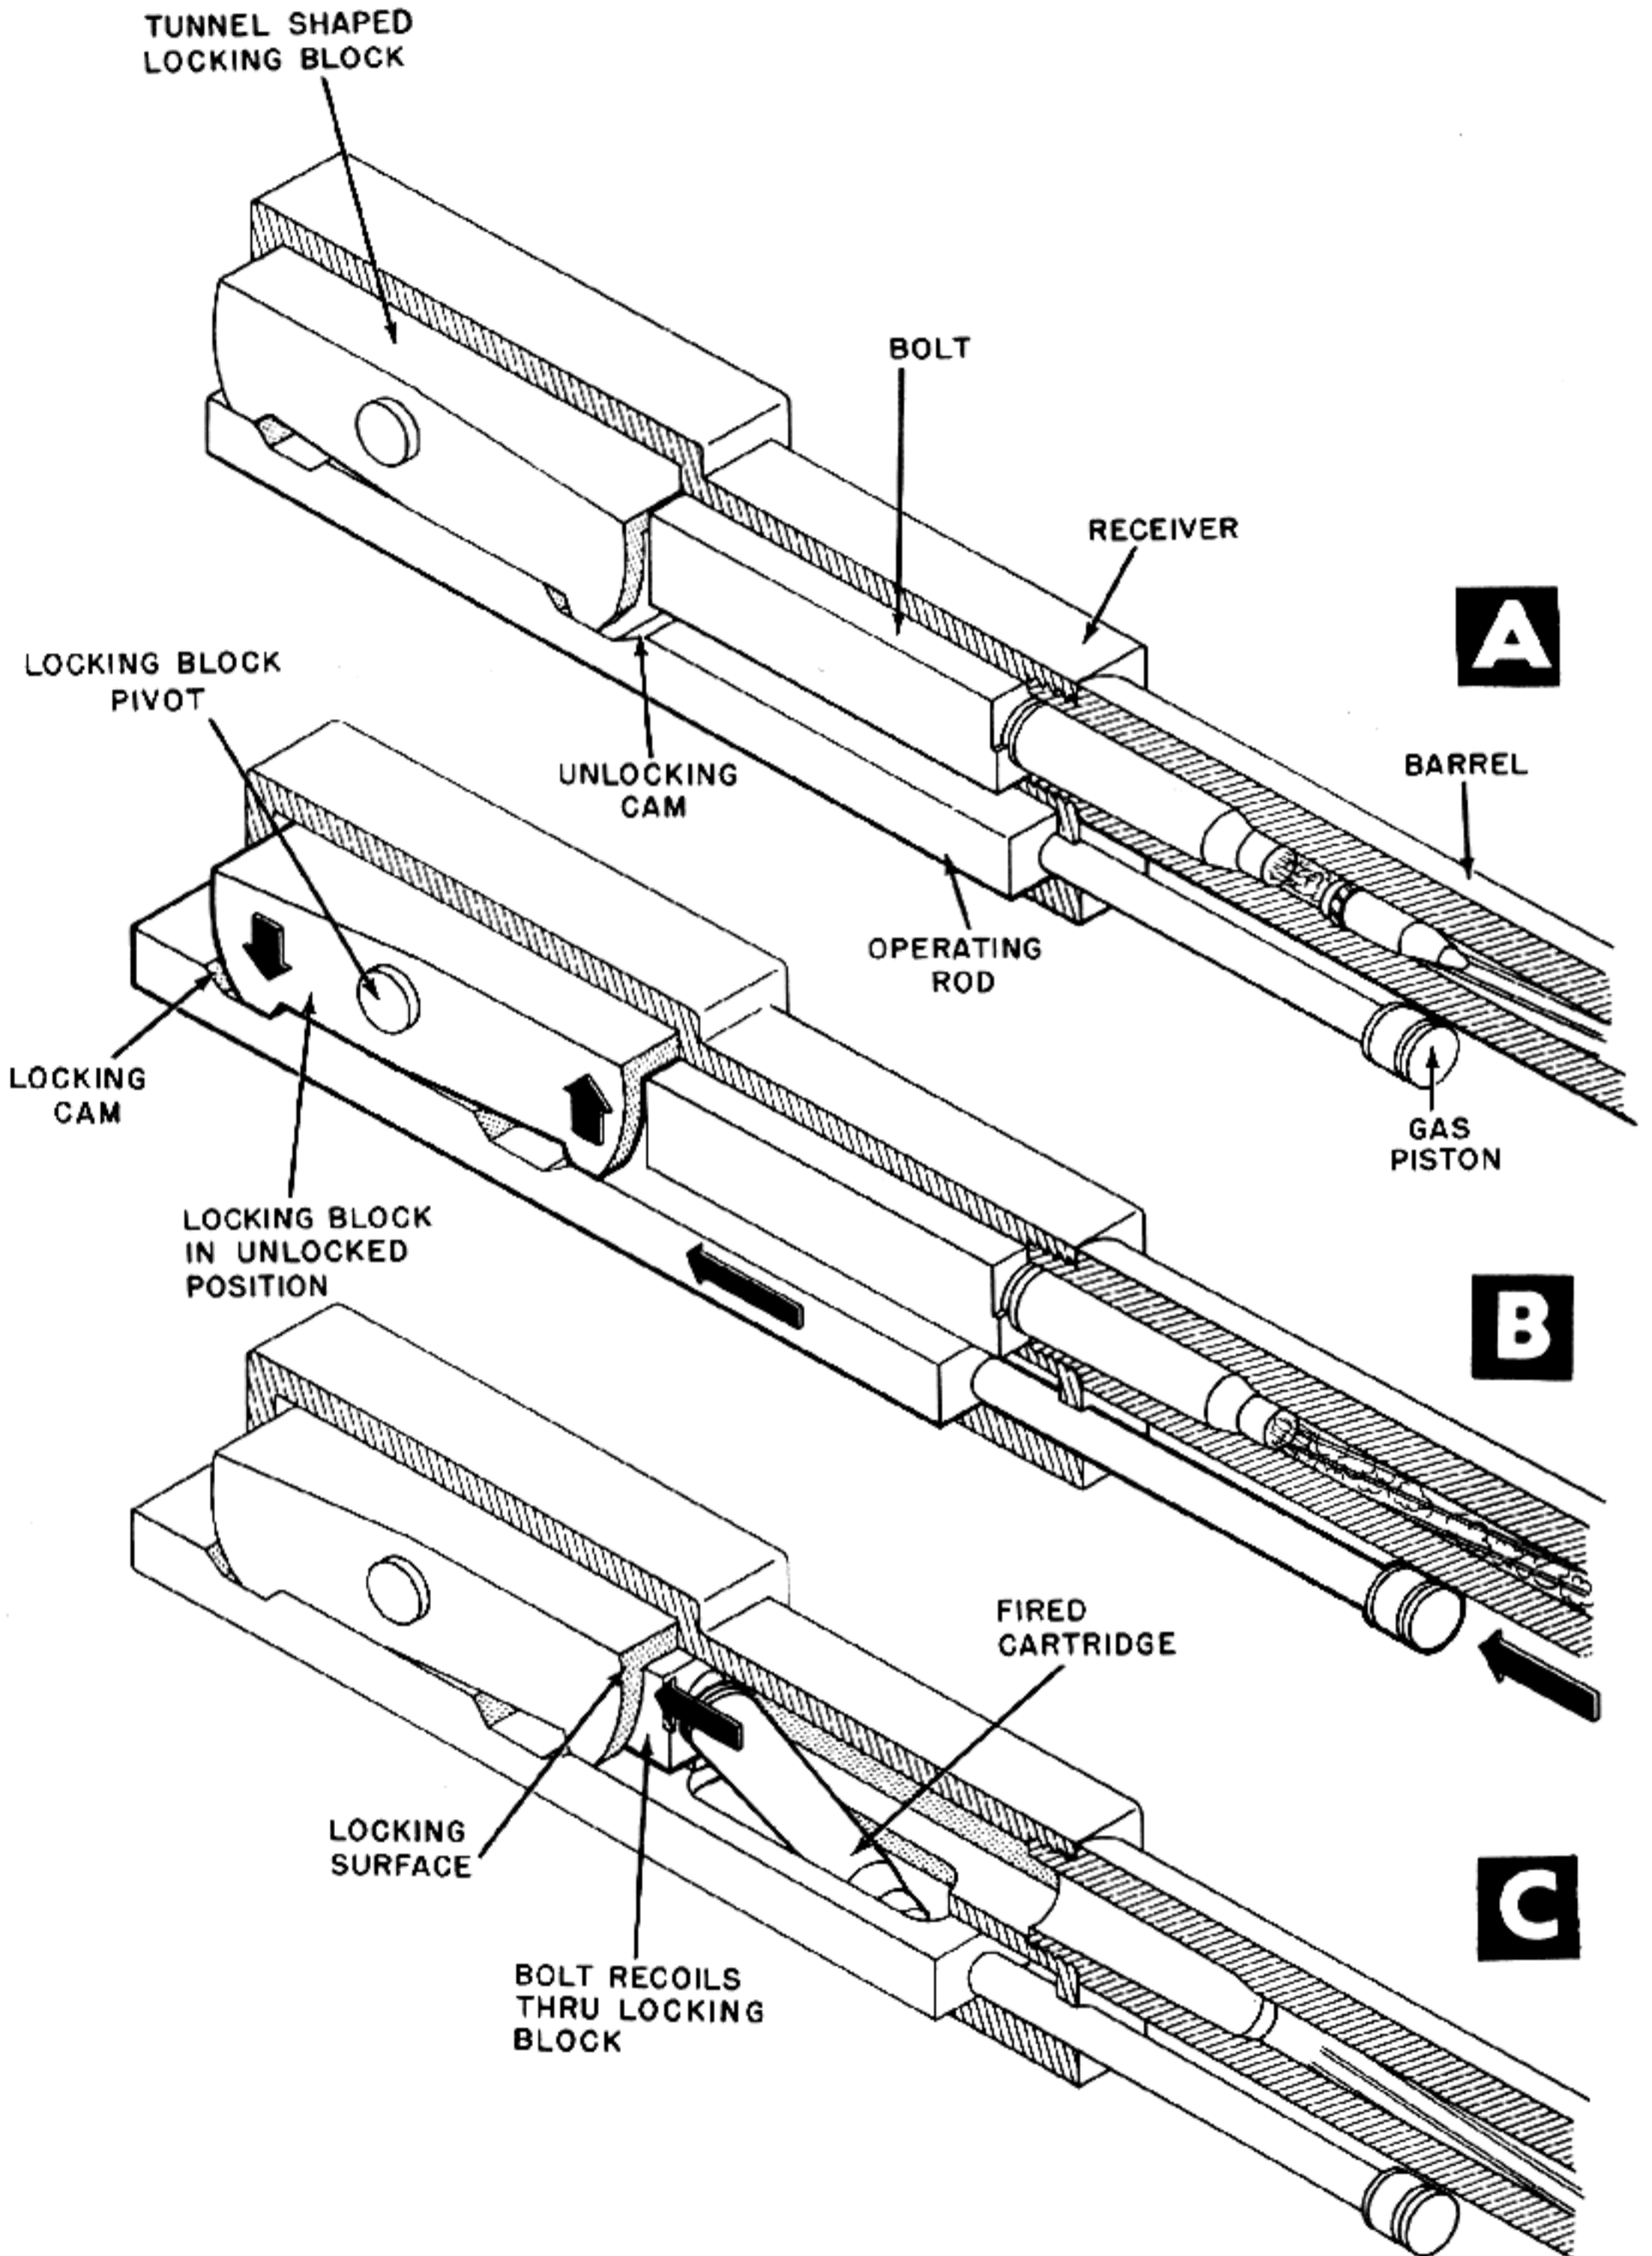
Operating Rod Cams Pivoted Locking Block To Unlock Bolt.
